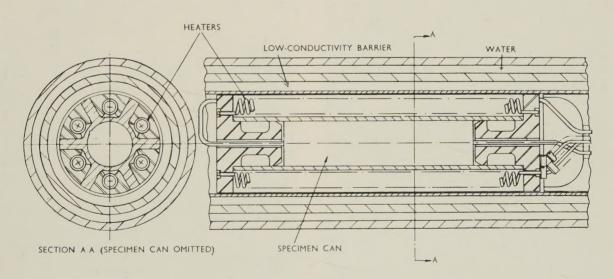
Apparatus for Specimens of Higher Heat Outputs.
